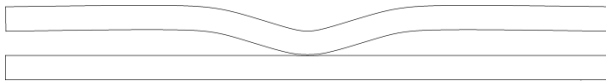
Cut view through the welding setup at the moment of the first contact between flyer and target.
